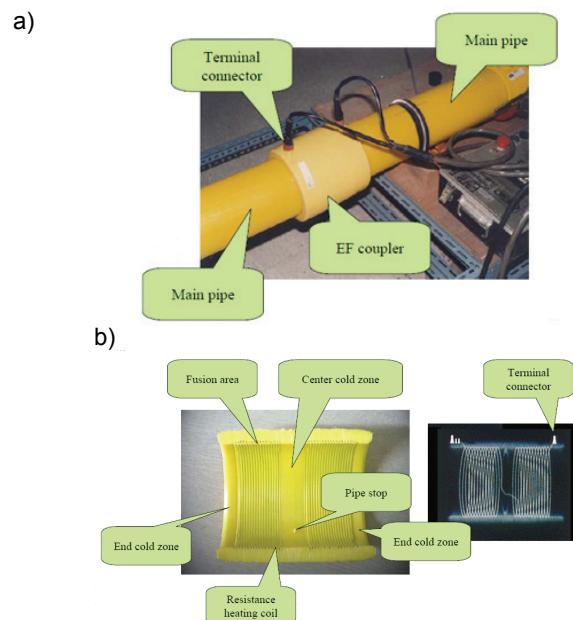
a) Electrofusion fitting b) An electrofusion cross section [4].
